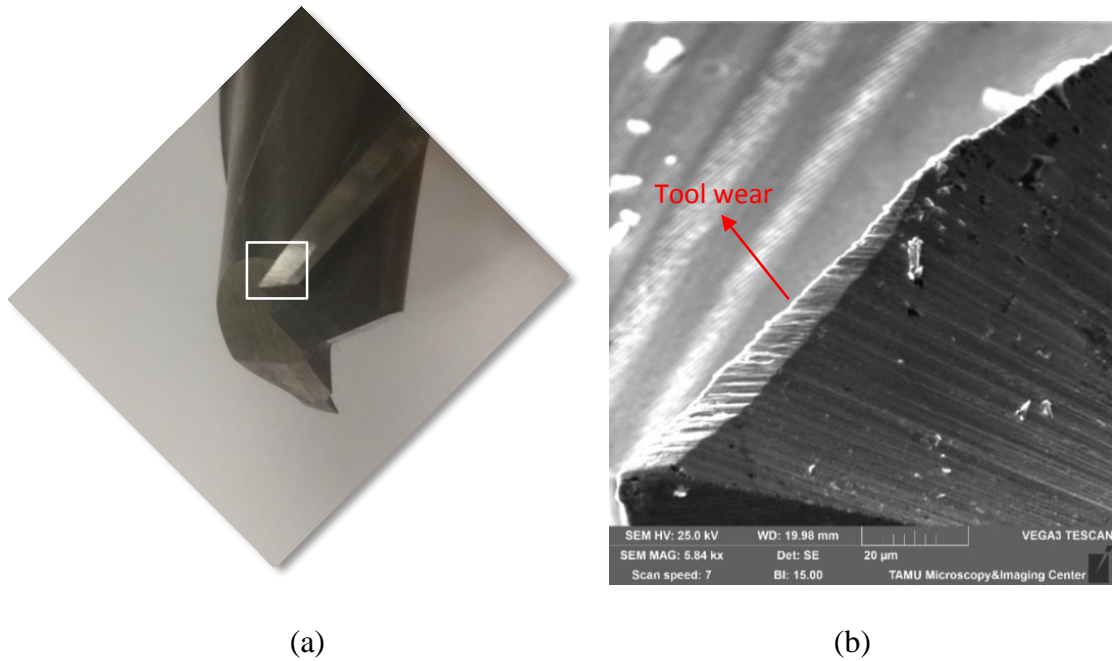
(a) Flat end mill showing view area of micro end mill tool. (b) Scanning electron microscopy image of cutting edge of uncoated WC tool, $\Phi 0.406$ mm, 10 m/min speed, $0.05 \mu\text{m/tooth}$ chip load, $30 \mu\text{m}$ depth, 24 mm milling length, MQL.
